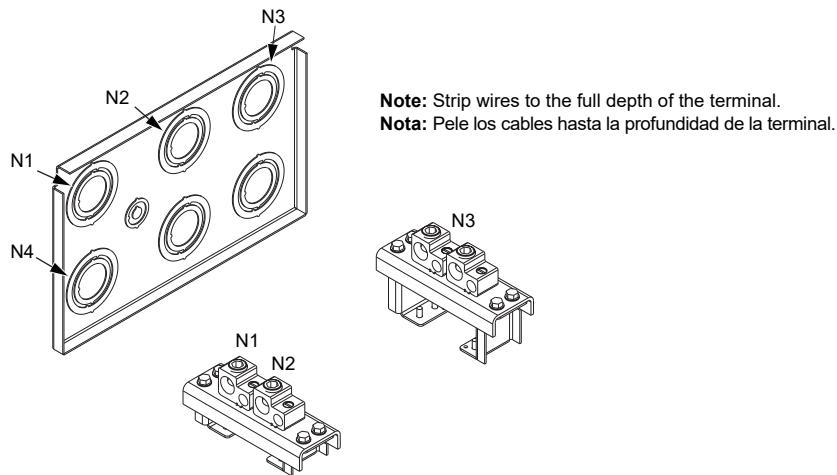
Ground and Neutral Lugs / Zapatas de tierra y neutro
